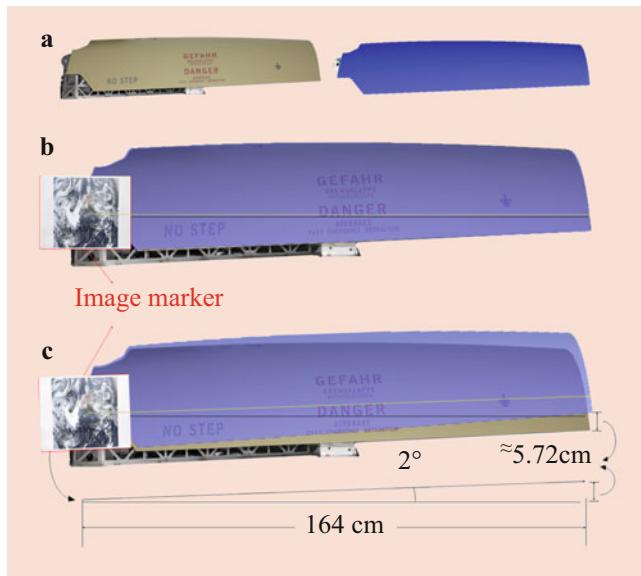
Example showing inaccuracy in geometric alignment due to wrong orientation of the marker. (a) Real (left) and virtual (right) aircraft component (air brake). (b) Virtual component accurately superimposed on real component. (c) Misalignment caused due to an offset of 2 degrees in tracked orientation. (© DLR 2020, CC-BY 3.0)
